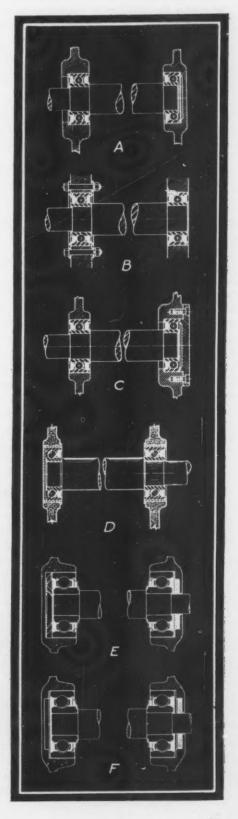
Plate type bearings can be used where separate lubrication for bearings is maintained
